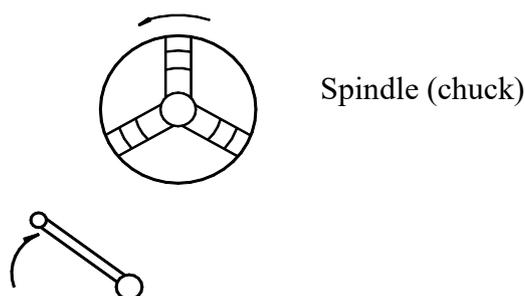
Operating handle for forward and reverse of spindle and rotating direction of spindle
